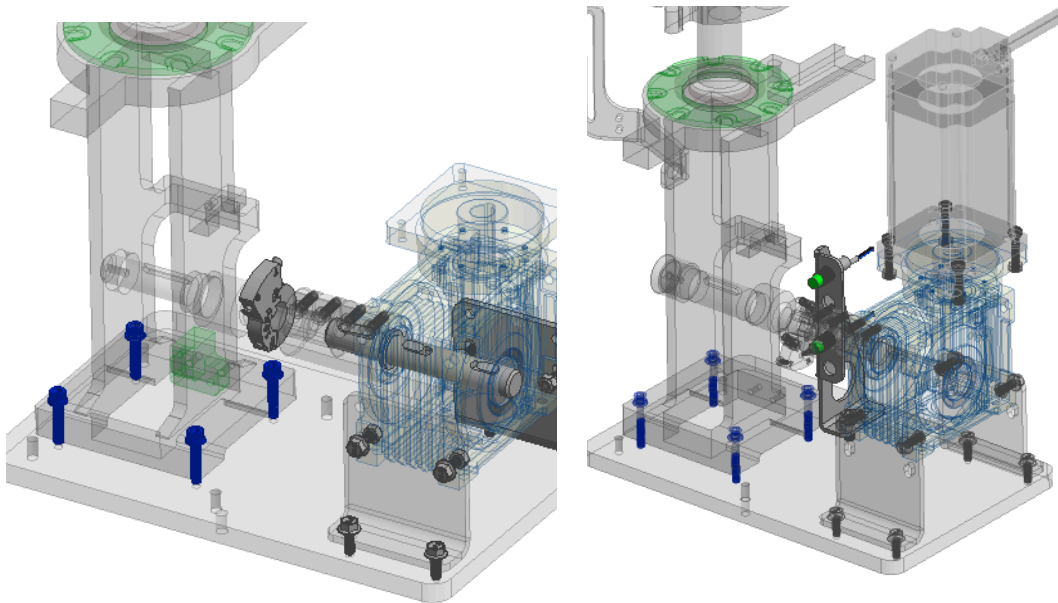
Flag installed on keyed shaft, T and B markings facing outward
